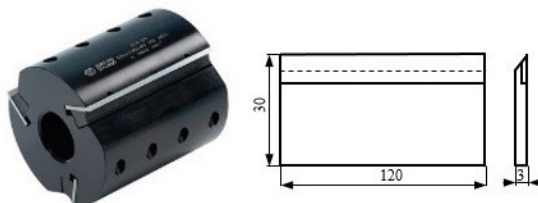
Assembled cutter head with insert knives and TC cutting edges, type K20
